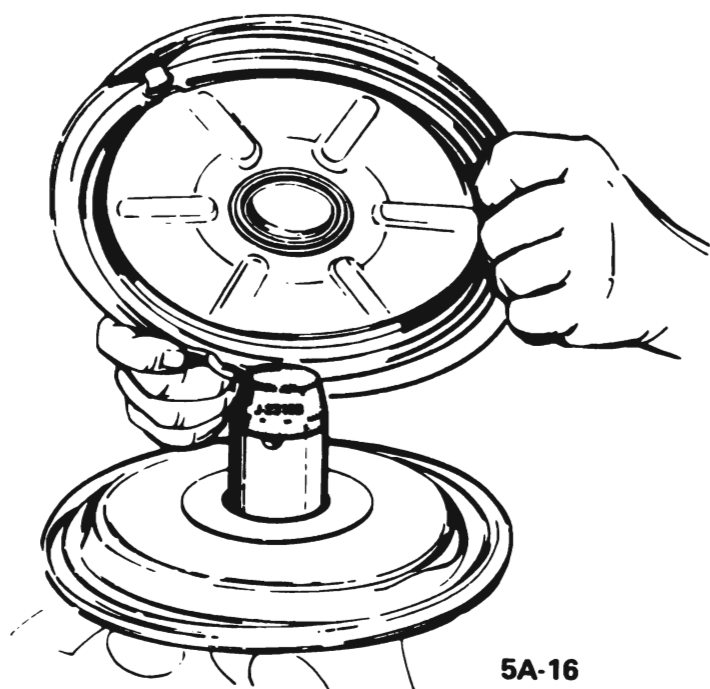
A-16 Positioning Housing Divider Over Secondary Bearing Protector Tool J-23188
